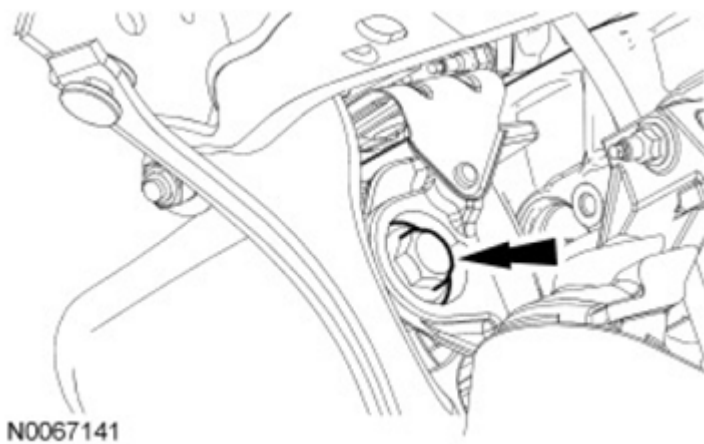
Locating LH Engine Support Insulator Through Bolt
